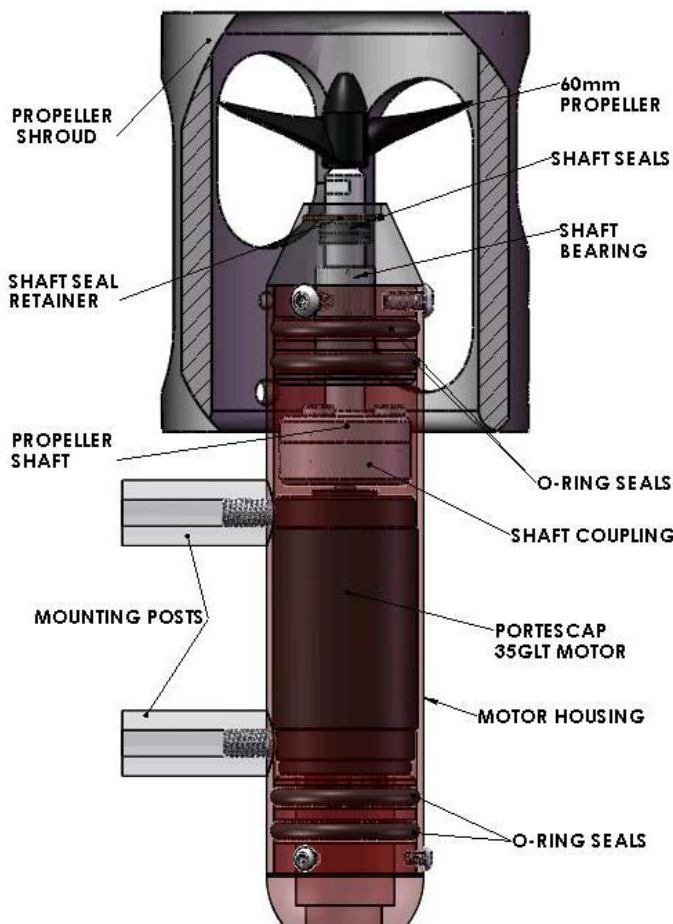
SOLIDWORKS CUTAWAY VIEW OF THRUSTER
